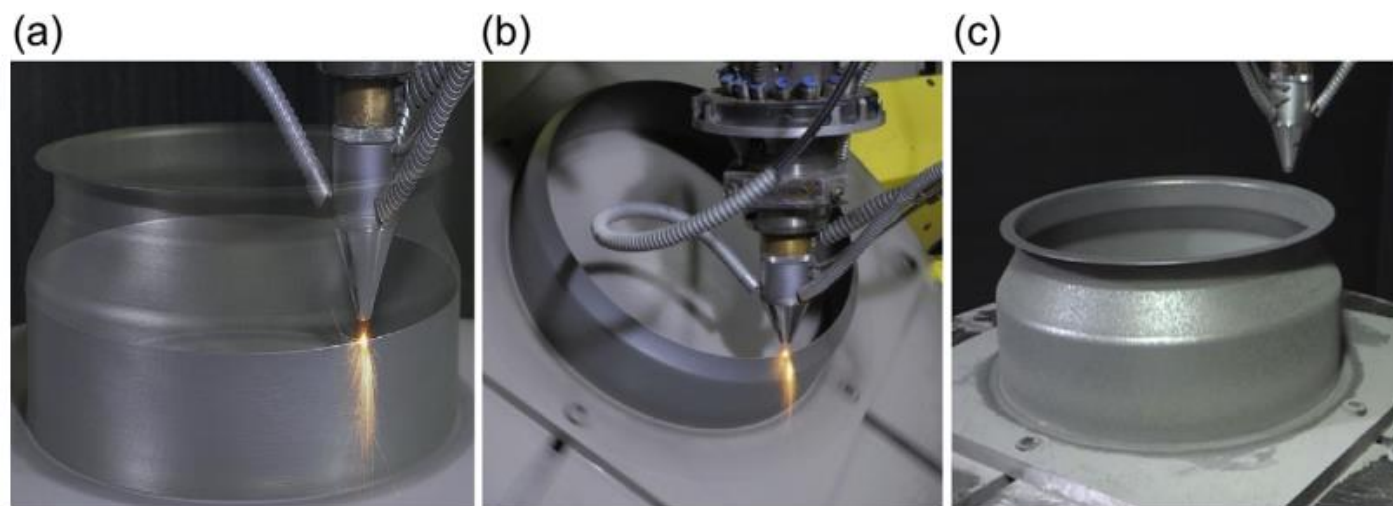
IN718 helicopter engine combustion chamber fabricated by a five-axis LMD process: (a) deposition showing the 2.5-dimensional tool path; (b) multiaxis deposition; and (c) the finished part.
